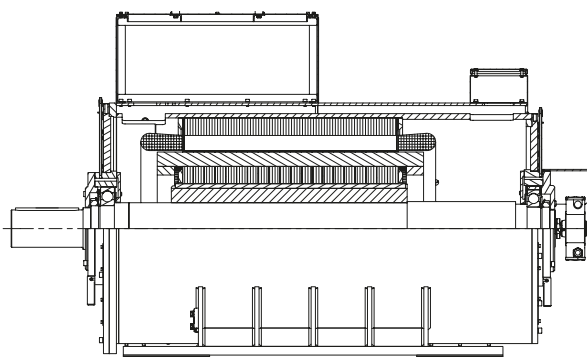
Design examples for welded-steel transnorm motors, types of cooling IC 411 and IC 416
